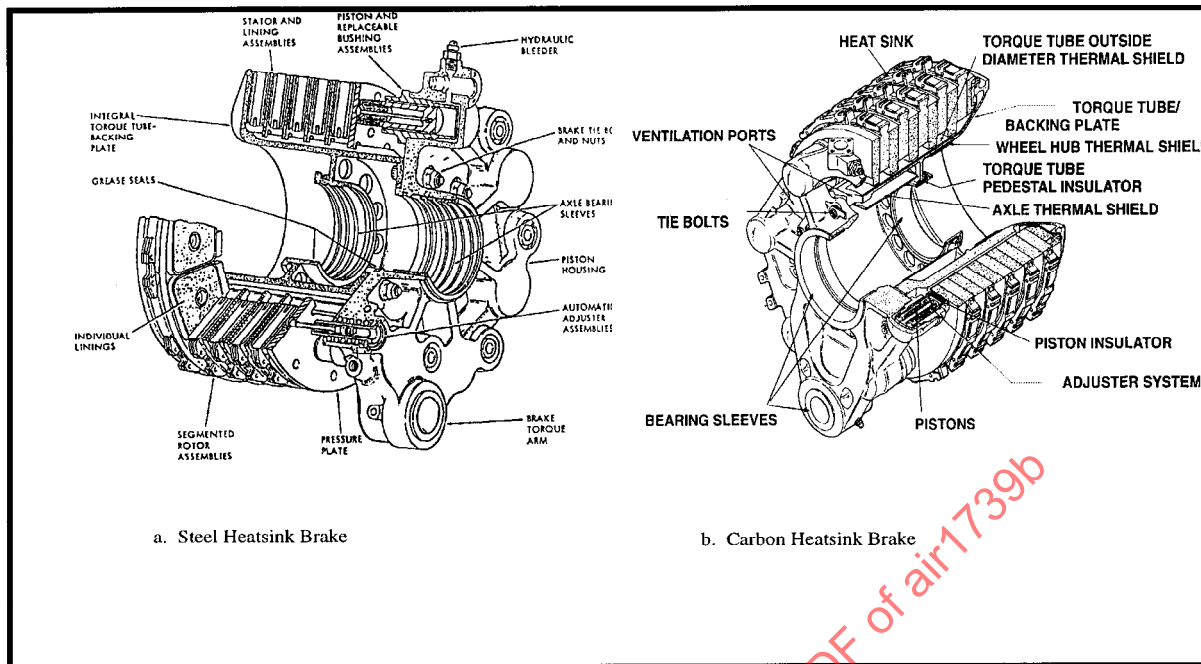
TYPICAL AIRCRAFT BRAKE ASSEMBLIES
